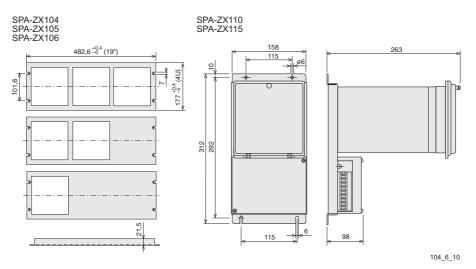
Mounting cabinets and frames as well as projecting mounting (dimensions in mm)
